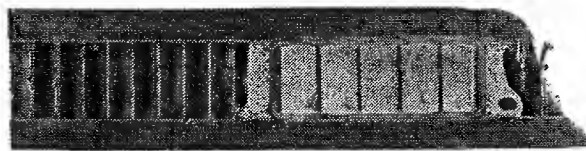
Window Cutout Core Close-Out Manufacturing Demonstration (Braided and Resin Transfer Molded Fiberglass/Epoxy Tubes with Syntactic Foam Filled Honeycomb Core).
